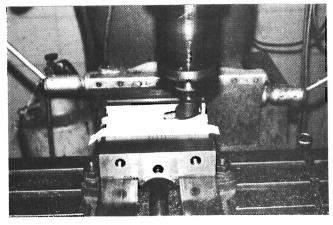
SMRD 100F90 Milled With a Diamond Fly Cutter
